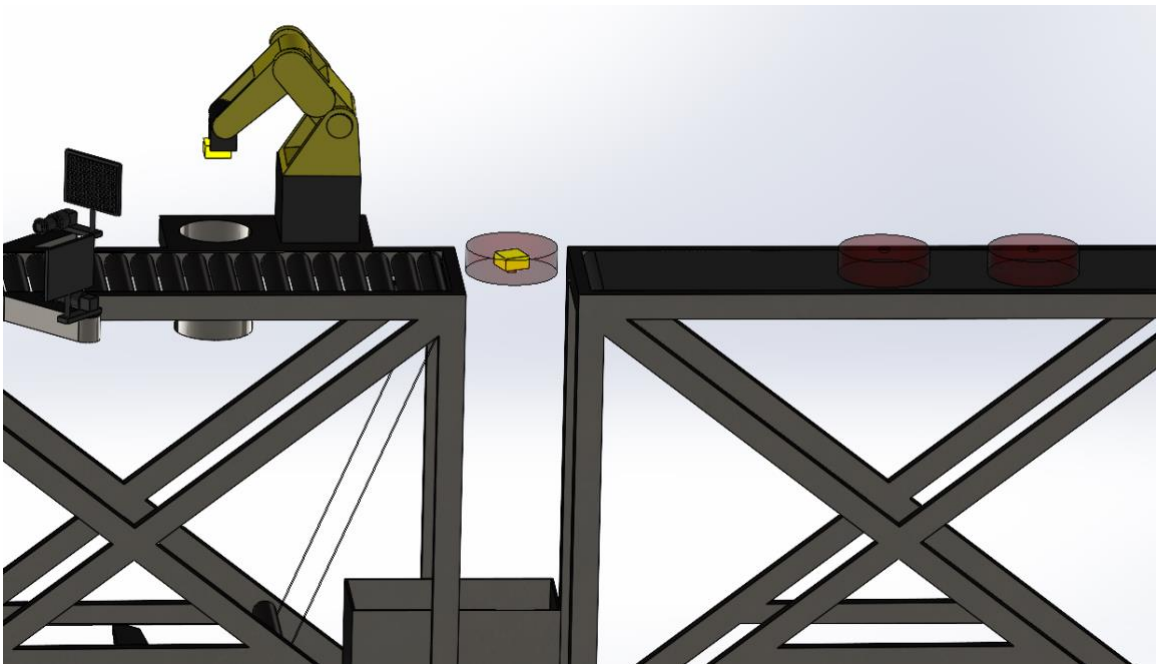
Retracting conveyor belt to remove plastic-contaminated meat; either located on underside or  $<100\text{cm}^2$
